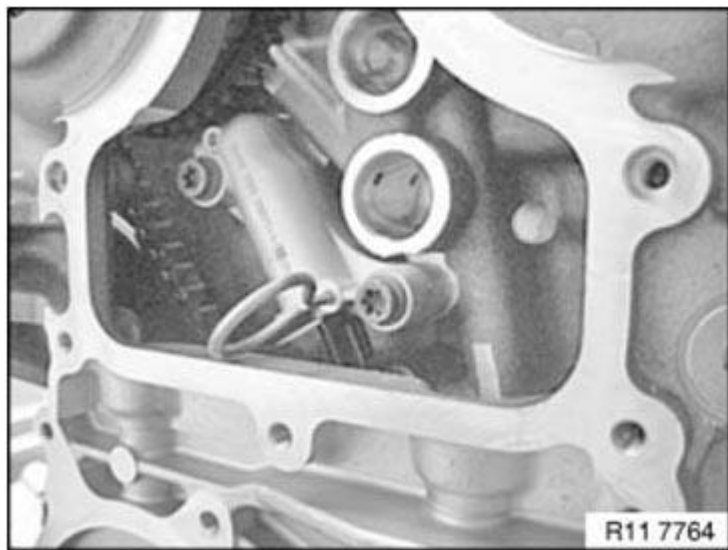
Identifying Chain Tensioner Piston Retracted Over Its Full Length
